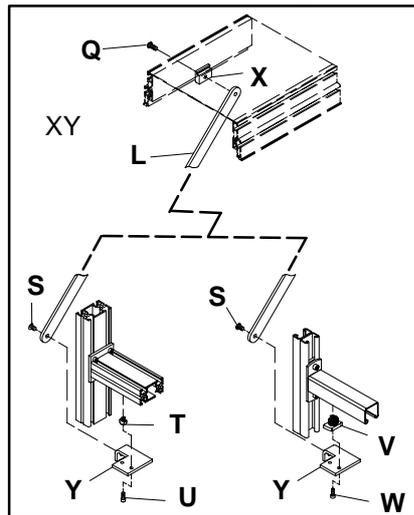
Aluminum Stand (left) & Steel Stand (right) Diagonal Brace Connection to 3100 Series Conveyor
